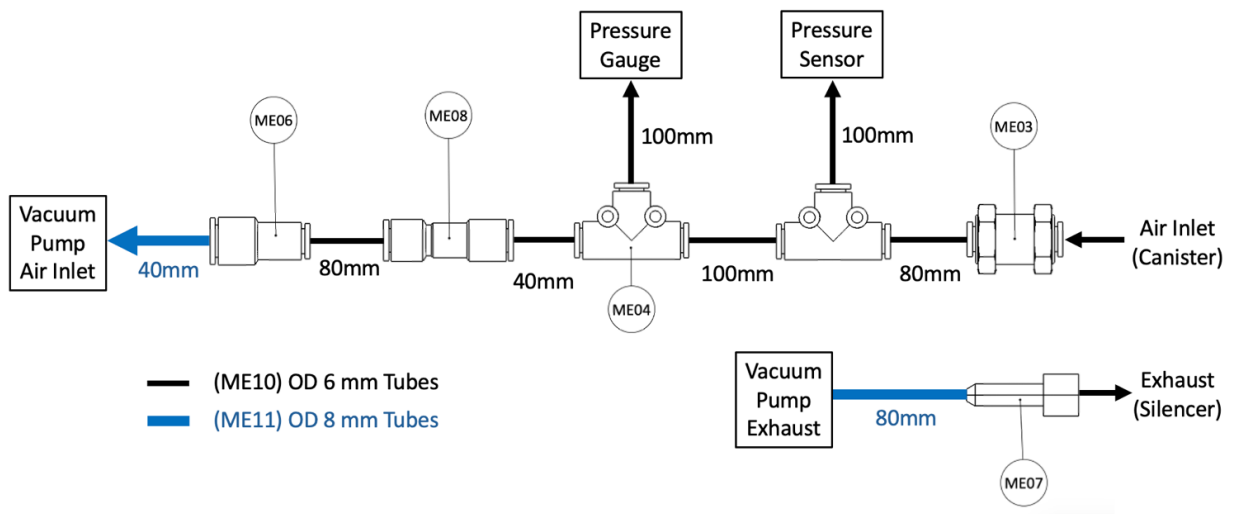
Instructions for connecting the tubing for the WOCA vacuum pump.
